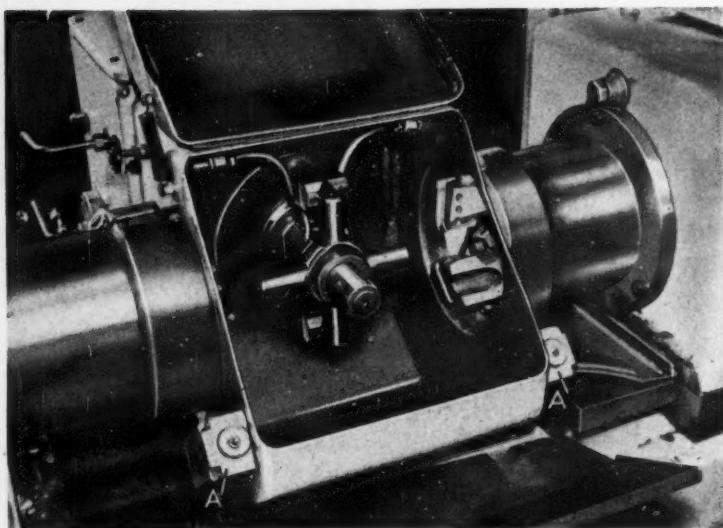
Close-up view of the work-holding arrangements and tooling on the Witzig & Frank machine. Following the initial turning operations on the horizontal arms, the component is indexed through 90 deg. to bring the other arms into position
